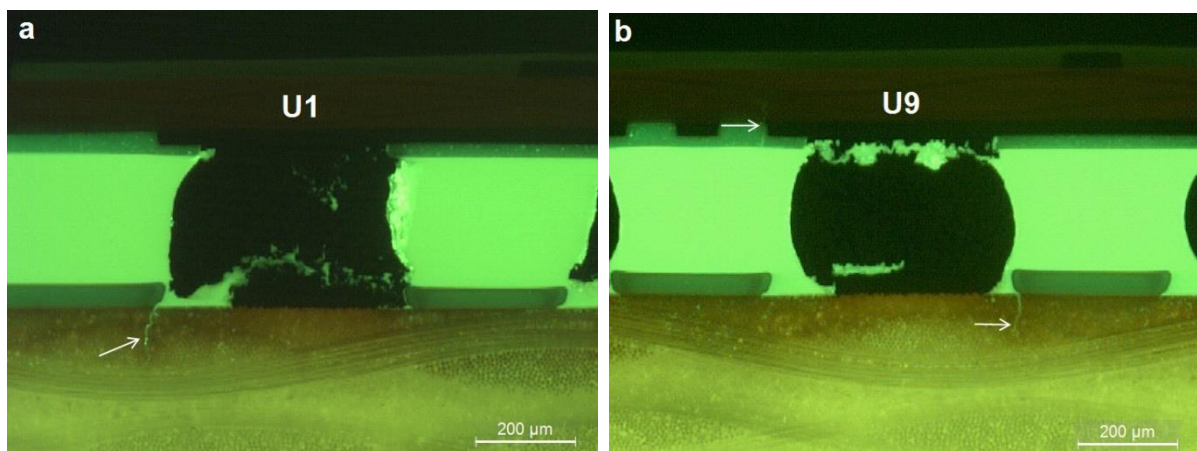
Cross-sections of solder joints a) U1 and b) U9 in the outer row of solder joints to a BGA208 with SnPb solder joints showing cracks in the PCB. A crack in the BGA laminate can be observed for solder joint U9.
